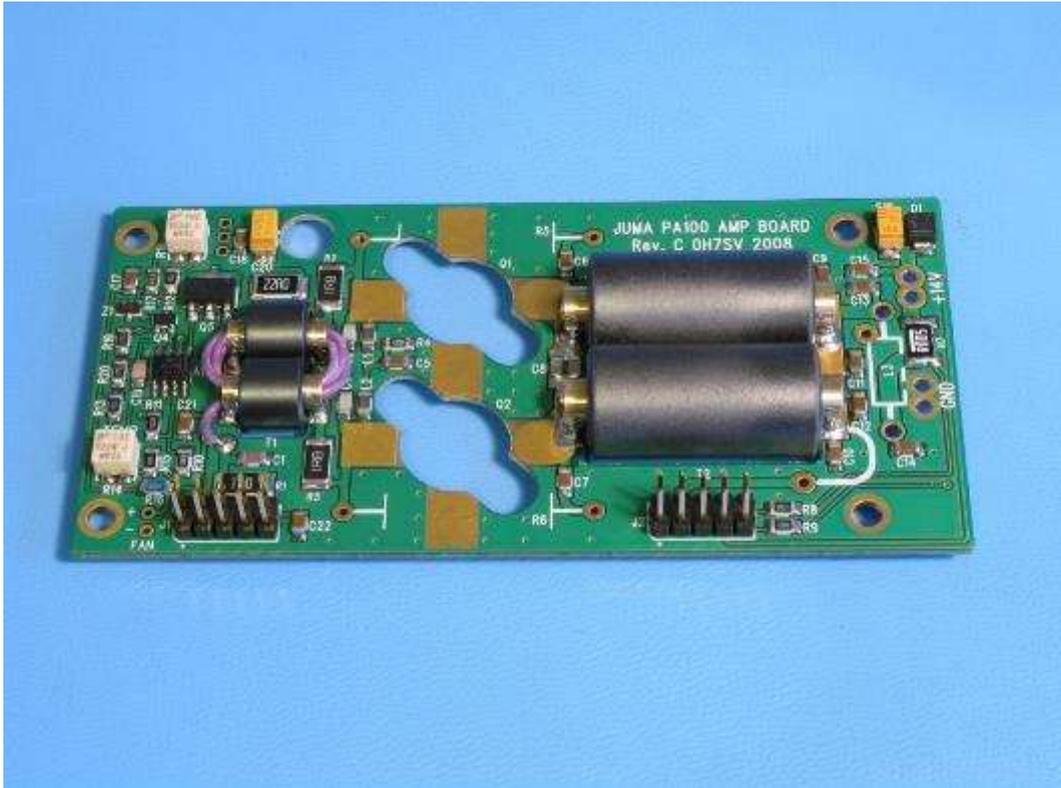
Solder the transformer T2 brass tubes with ferrites.
